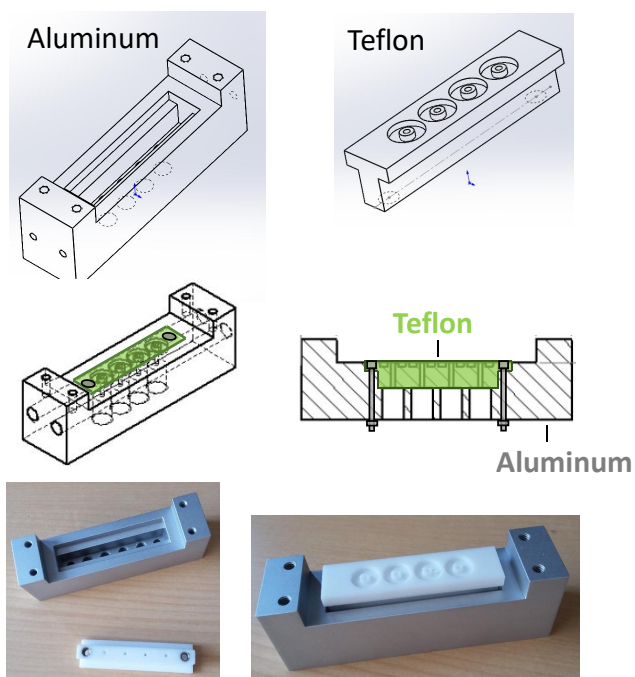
Bottom part of the inlet block consist of an aluminum housing and a Teflon piece for the corrosive reagents. Positions of the inlet and outlet channels are visible in the drawings, as well as through holes for the cooling liquid on the side. Photographs show both parts and their assembly.
